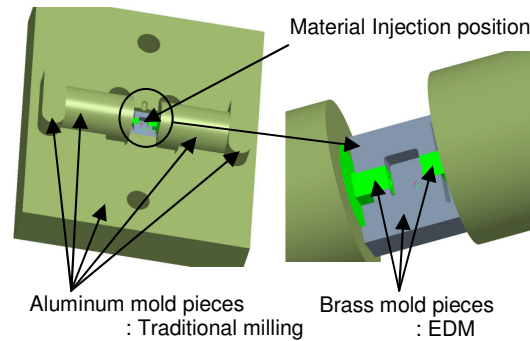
MOLD ASSEMBLY FOR STAGE 1.
